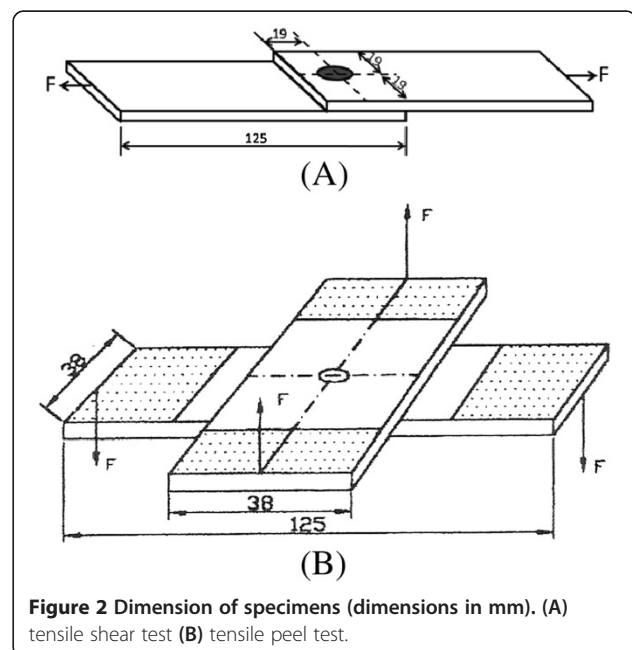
Dimension of specimens (dimensions in mm). (A) tensile shear test (B) tensile peel test.
